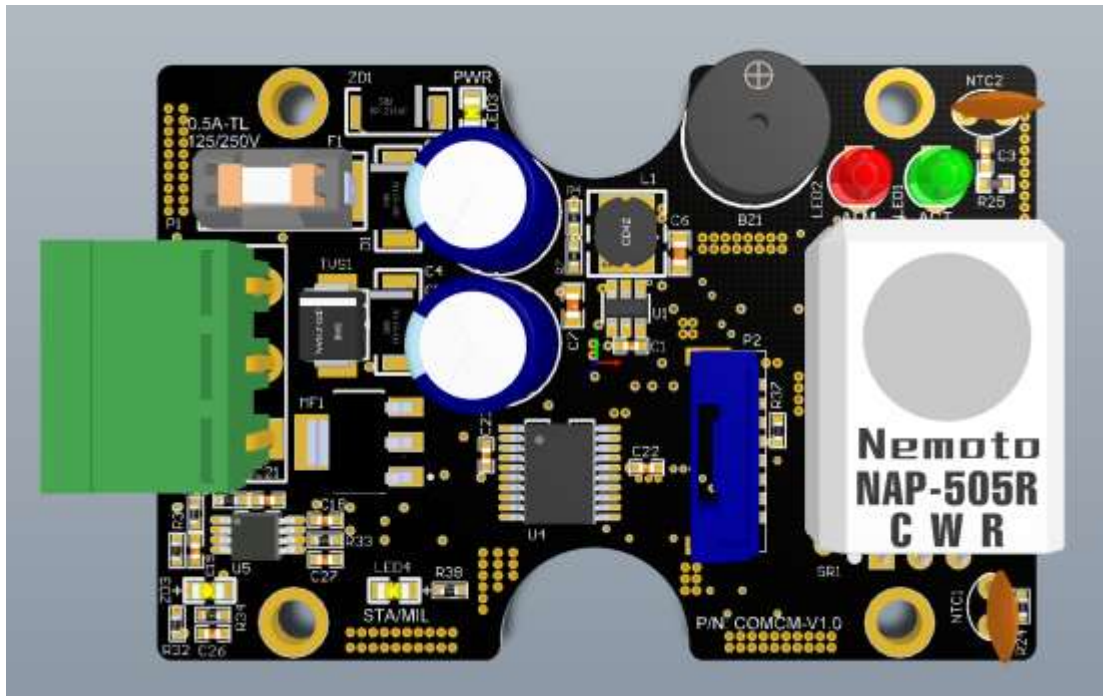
PCB 2D 3D design of Poisoning prevention device for unpowered internal combustion engines
